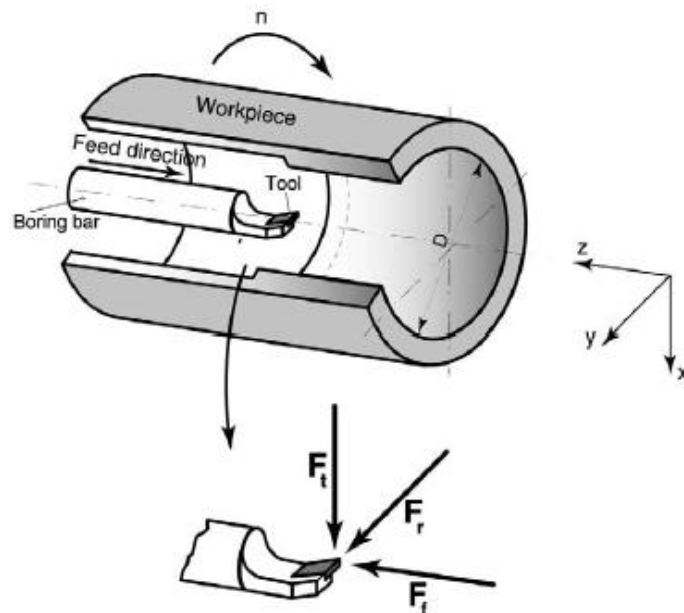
Boring with rotating workpiece (Altintas, Mechanics of boring process - Part I, 2003)
